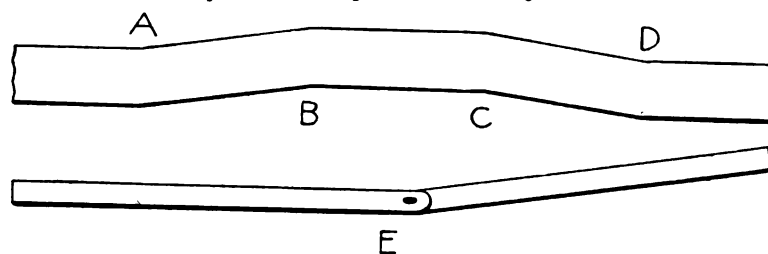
METHOD FOR SETTING RING OF DIPPER AT PROPER ANGLE.
